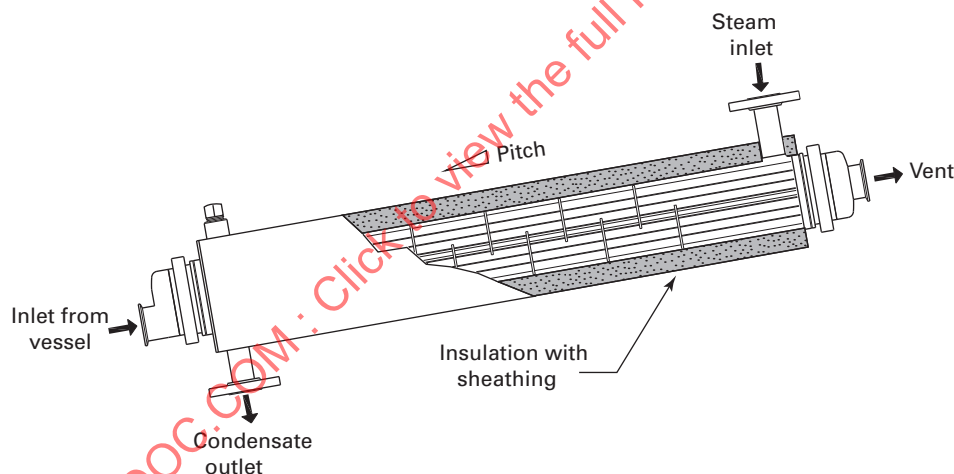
Exhaust Gas CondenserFig. SD-5.1.1.3.1-2 Exhaust Gas Heater
